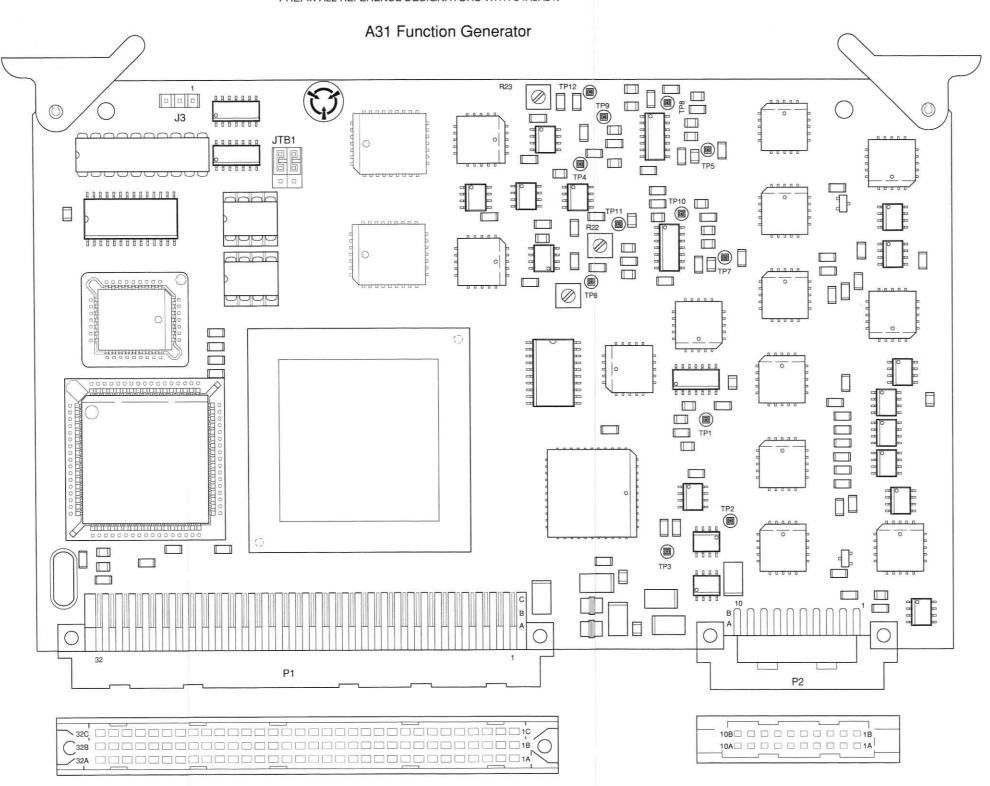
34A5A29 PC Board Assembly Component Locator Diagram
